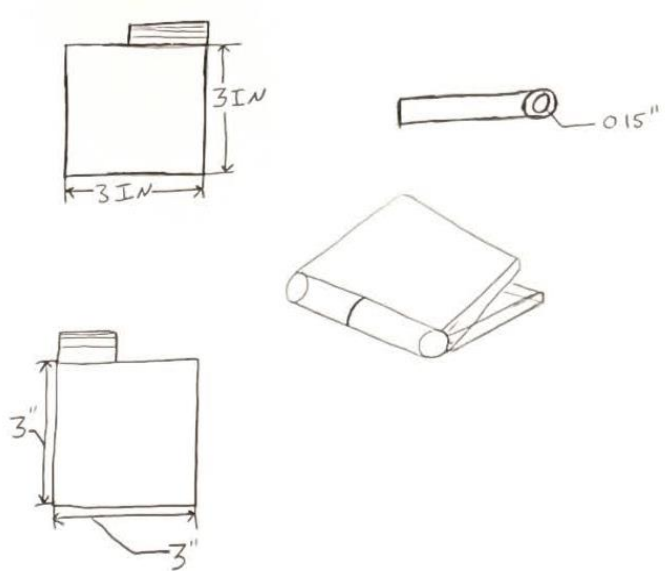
Initial page of exploratory hand sketches showcasing initial design for the stand
